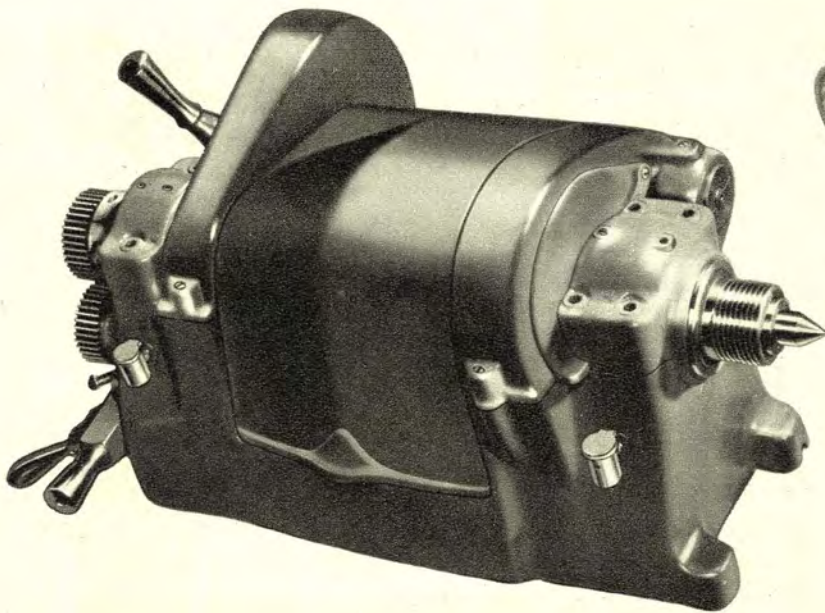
Headstock for 16-inch Swing South Bend Lathe
